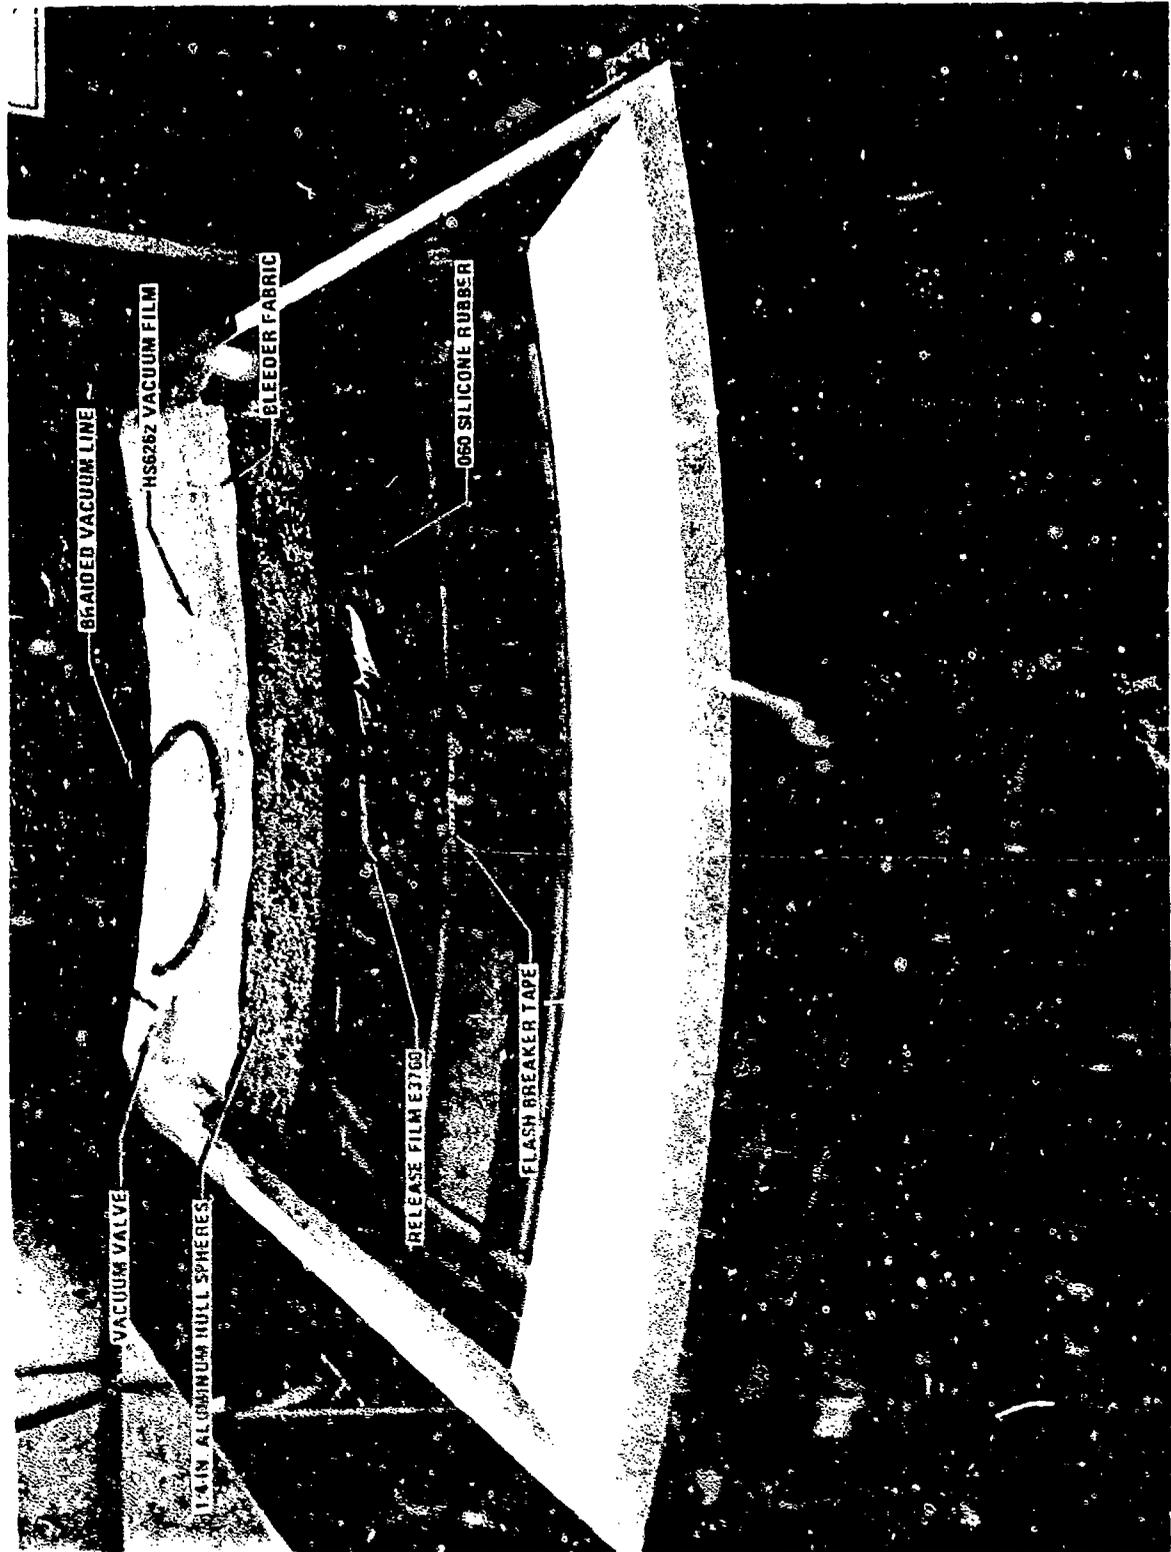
FEMALE BONDING TOOL WITH ALUMINUM SPHERES USED TO DISTRIBUTE PRESSURE
